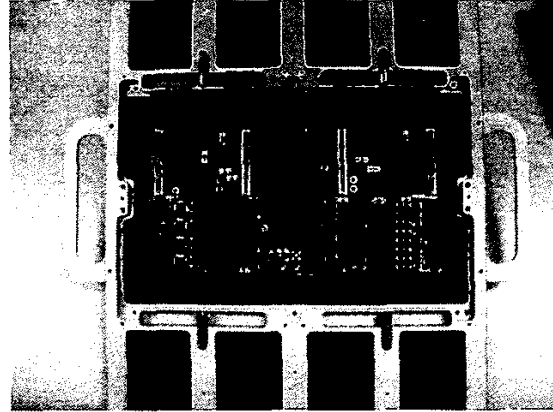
Bottom view of the active test interface loadboard, showing one each of the Driver and Receiver Modules [1].
